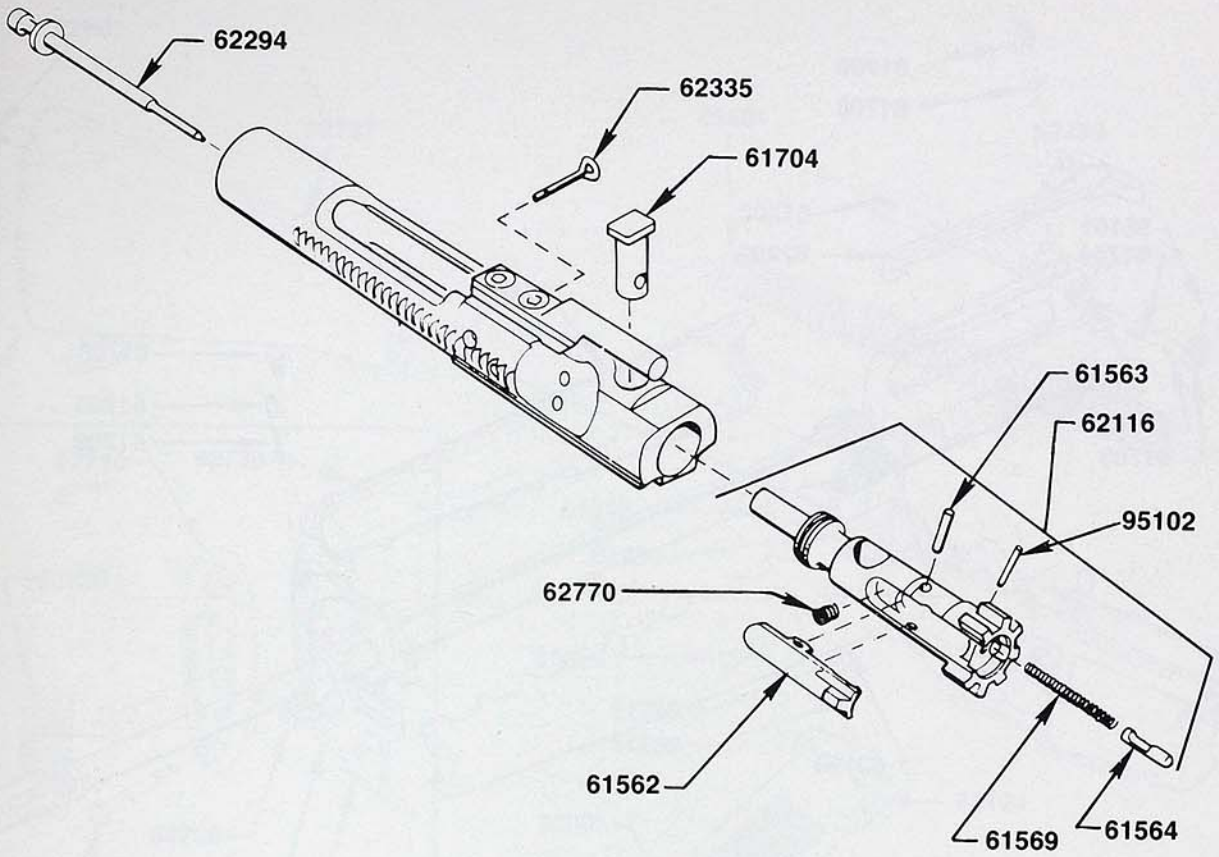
BOLT CARRIER ASSEMBLY PARTS
